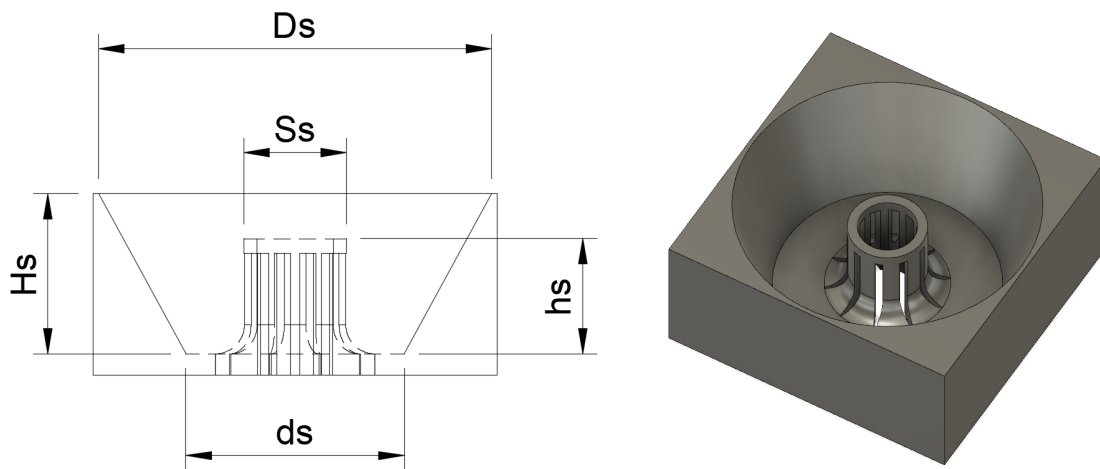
Illustration of the mold inserts used for the sunken tests.
